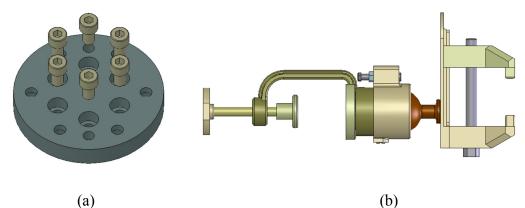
Test assemblies: a) Mounting Flange; b) Standard Vise
